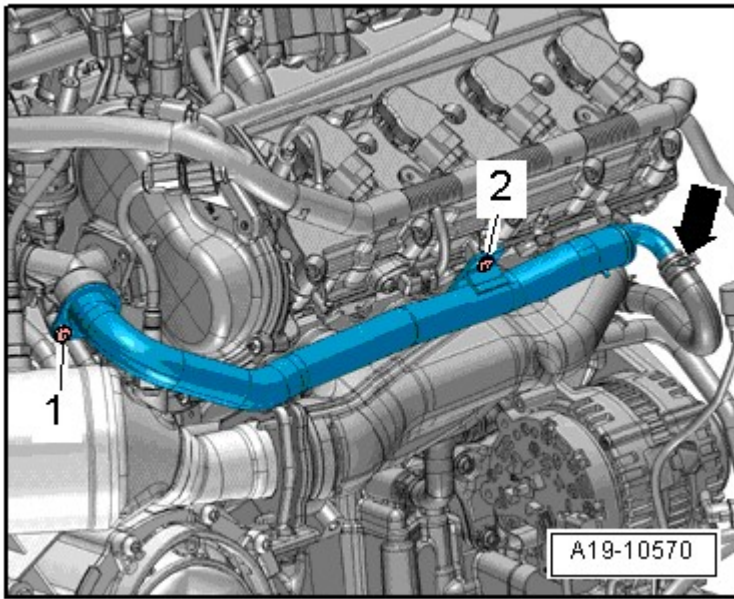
Identifying Bolts And Coolant Hose, Removal
